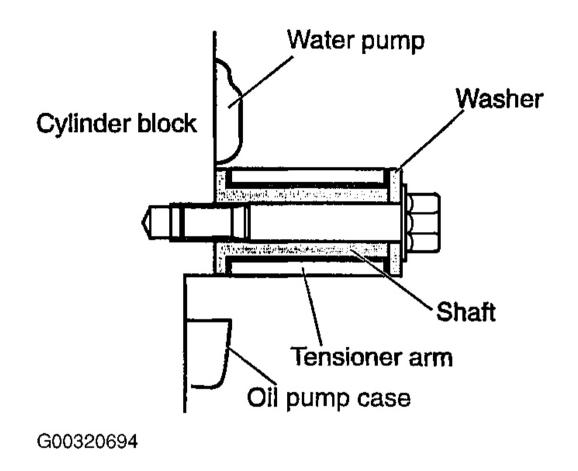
Installing The Tensioner Arm, Shaft And Plain Washer To The Cylinder Block Courtesy of KIA MOTORS AMERICA, INC.
